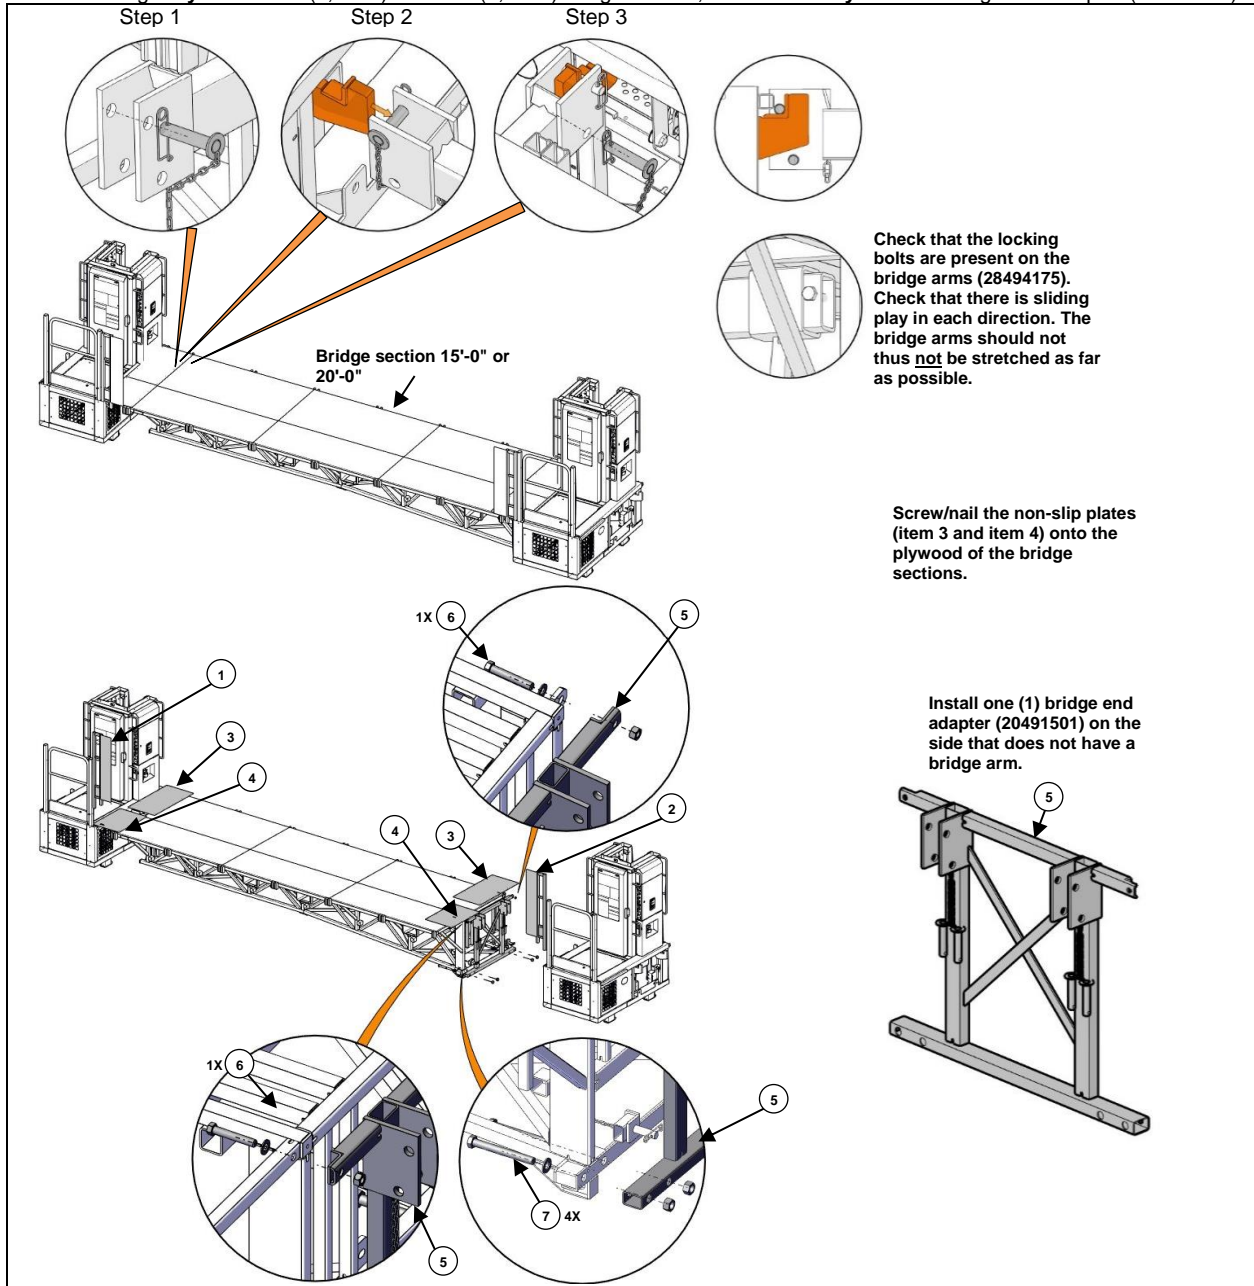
Installation of 15'-0" or 20'-0" bridge section between lifting units
